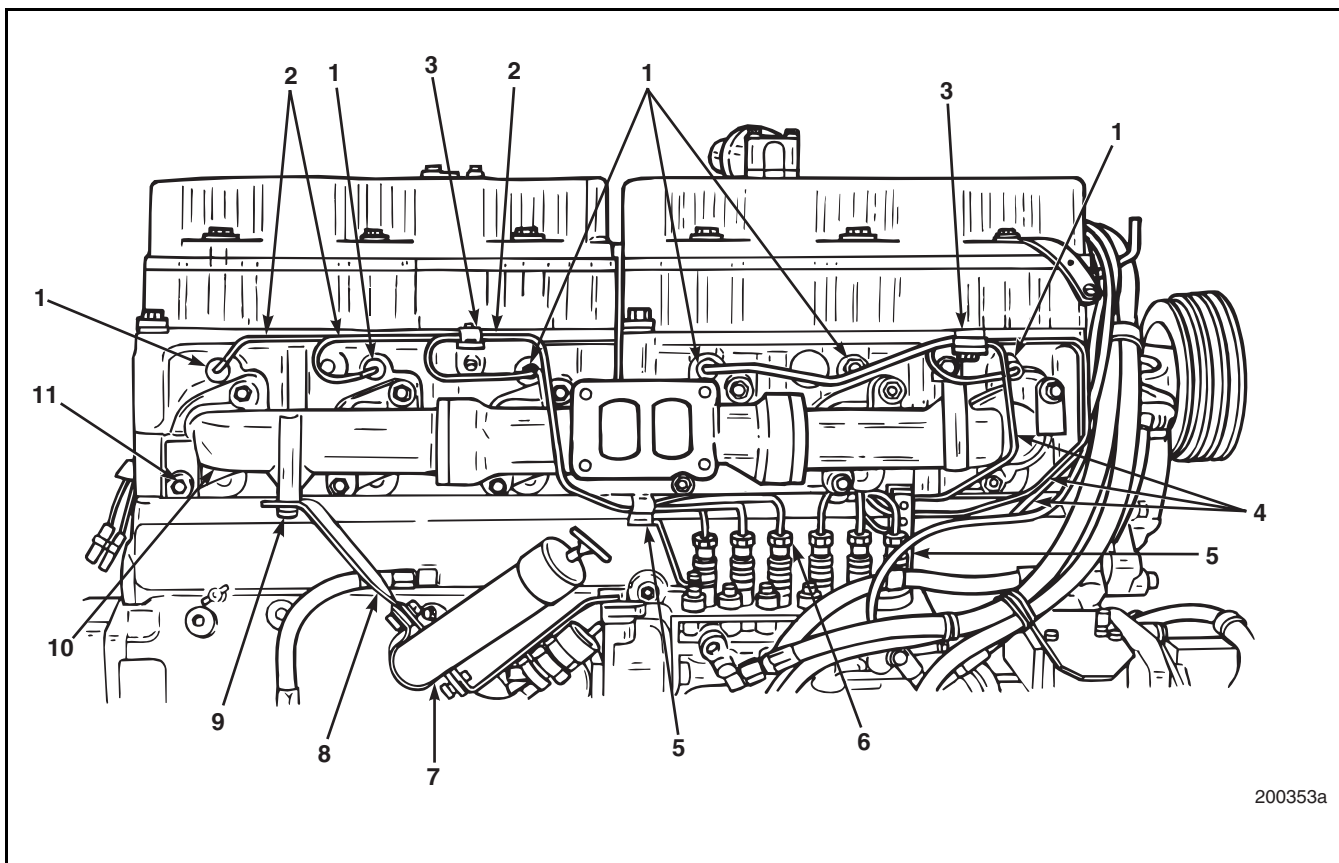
Fuel Inlet Tube Assembly Removal
